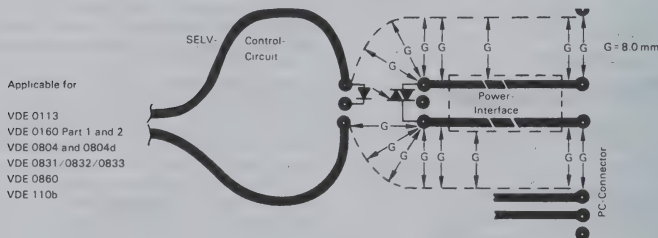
OPTOCOUPLER MOUNTING ON PC BOARDS FOR SAFETY CLASS II WITH CLEARANCE
